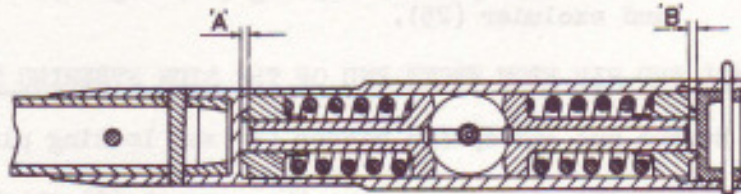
SECTION THROUGH BALL JOINT AT REAR END OF SIDE STEERING TUBE.
